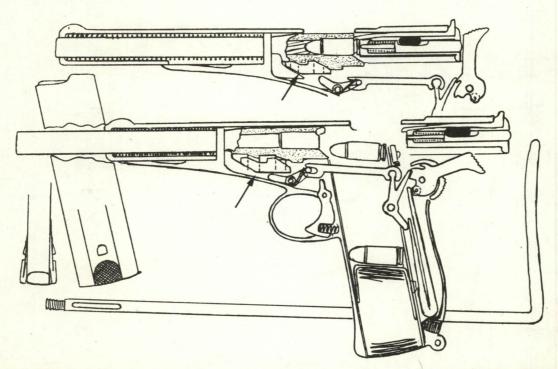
The 1910 version of the Campo-Giro self-loading pistol. Arrows indicate the sliding locking wedge. The L-shaped piece in the drawing is a stock for the pistol, which could be screwed into the socket at the base of the pistol grip. (Marsh)
